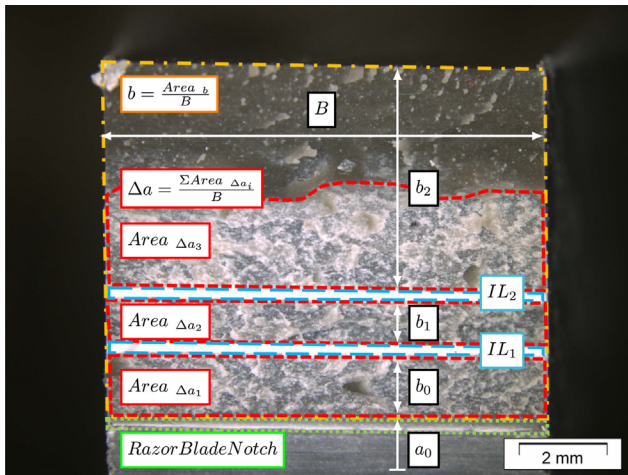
Analysis of fracture surfaces under the light microscope.
